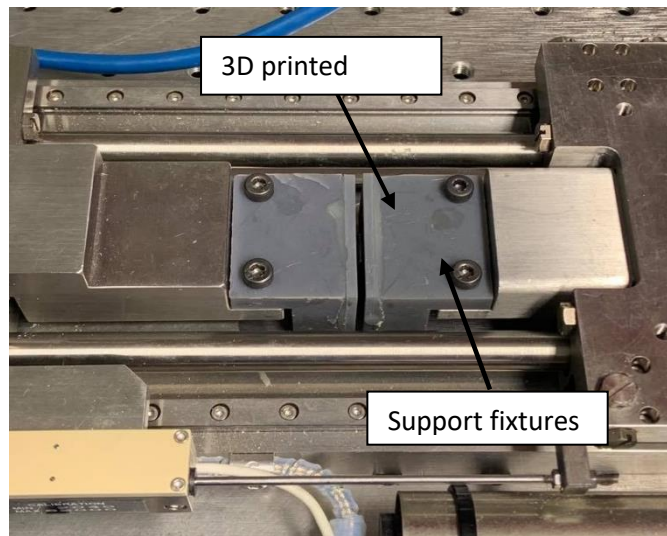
Photograph of butt joint test rig integrated within the Deben micro tensile tester. Support fixtures are fixed via screws into the main clamping jaws with the 3D-printed specimens fixed via adhesive.
